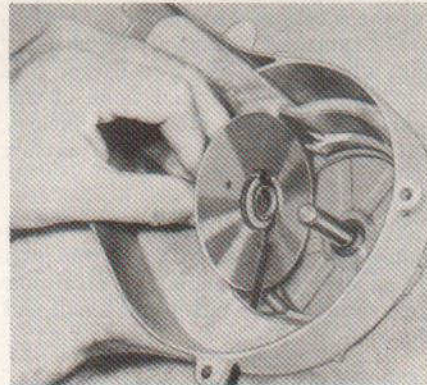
Rewind starter spring should be installed as shown through housing and attached to pulley.
